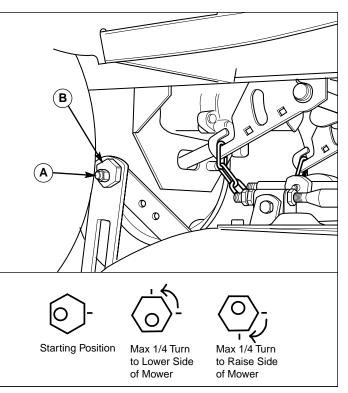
Side-to-Side AdjustmentA. Outside NutB. Eccentric Nut
